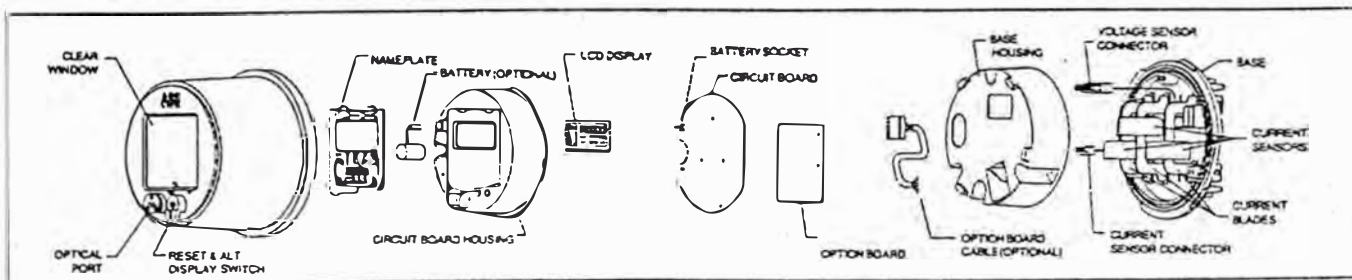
Exploded view of Alpha Meter Primary Components and Assembly Alpha Meters all use common components and subassemblies with only the base changing according to whether the unit is socket-mounted or bottom-connected. (Exploded drawing of socket base unit shown below. Photo of major components and construction of bottom-connected (A-Base) unit shown to the left. Except for the base assembly, construction and assembly is identical.
